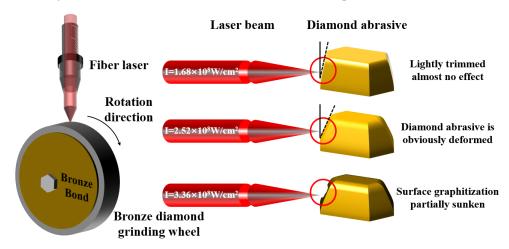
Laser dressing the bronze-bonded diamond abrasive grinding wheel experimental equipment.
